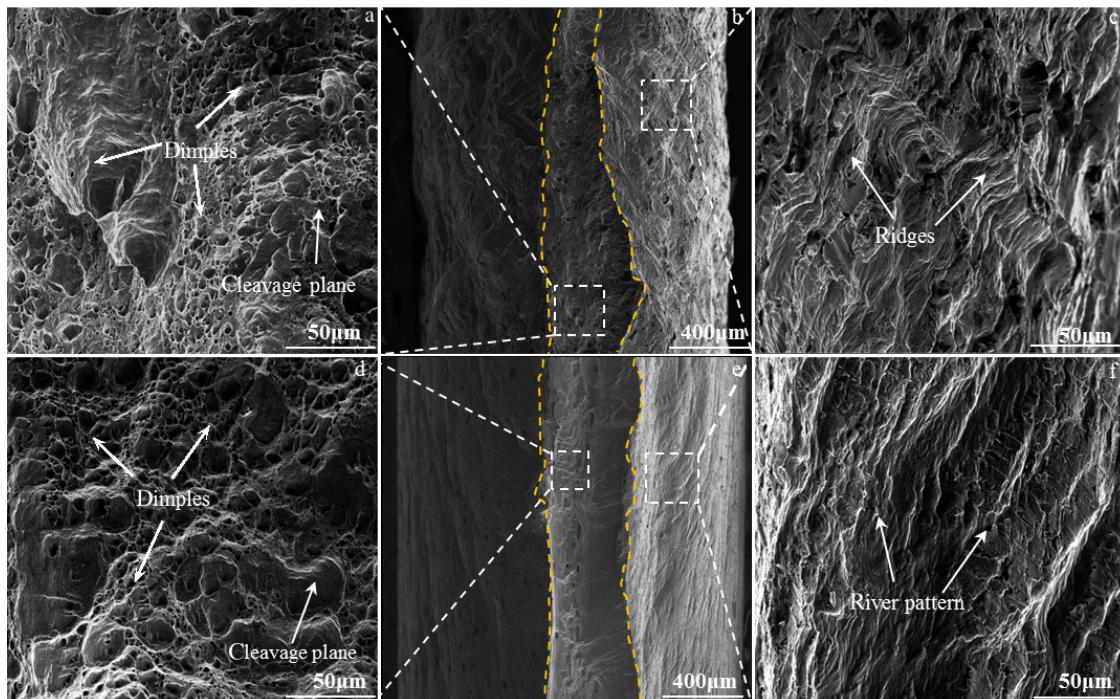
Tensile fracture morphologies of N6 under 0% (a~c) and 90% (d~f) cold rolled reduction
